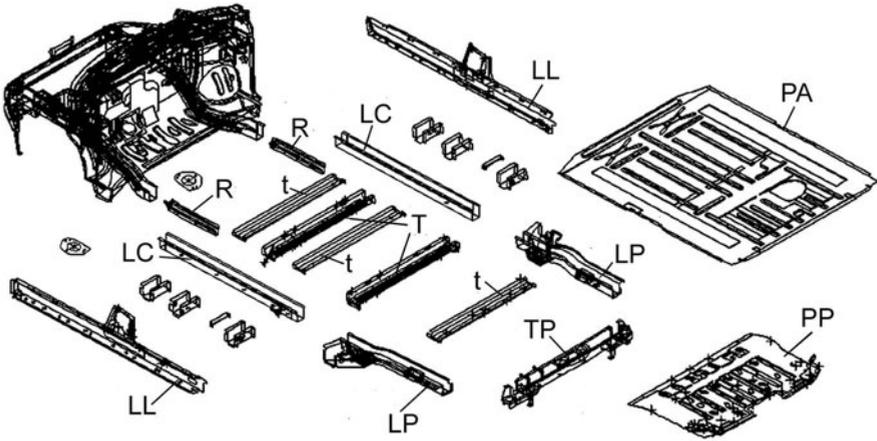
Floor of Fiat Multipla: PA) front floor; PP) rear floor; LL) sills; LC) longitudinal floor rails; LP) rear floor rails; R) floor rails reinforcements; T) main seats cross members; t) ancillary cross members; TP) rear cross member.
